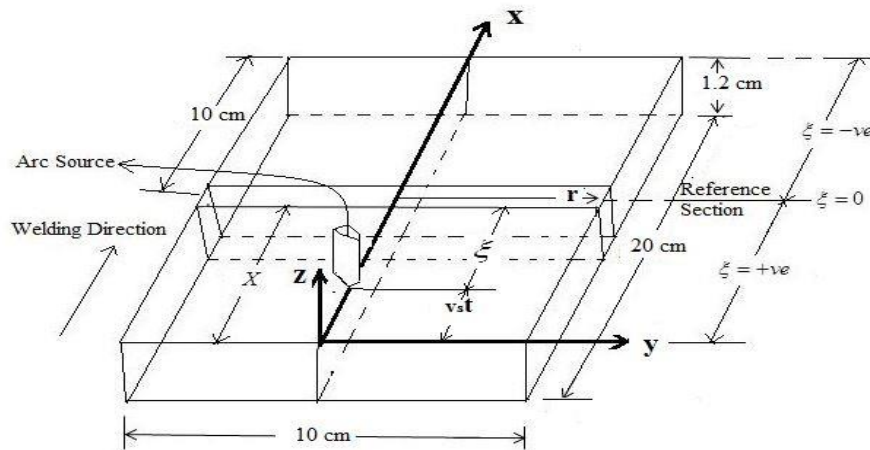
Dimensions of weld (all dimensions in cm) plate and discretization of plate section.
